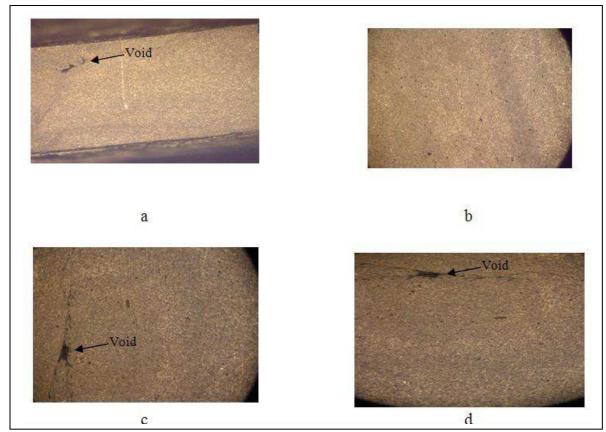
The macroscopic view of welded cross section in various welding parameters: a) Rotational speed of 2000 rpm and welding speed of 12mm/min b) Rotational speed of 2500 rpm and welding speed of 8 mm/min
